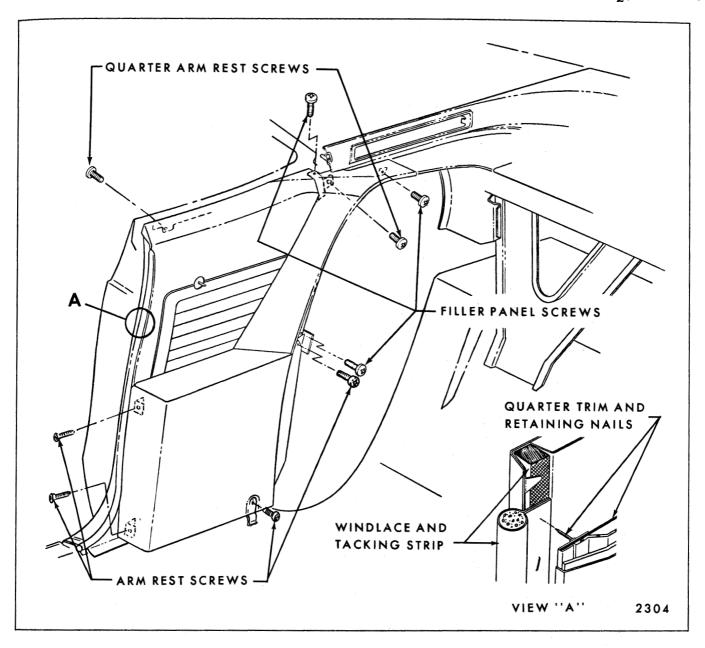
Rear Quarter Trim Assembly - "E" Body 39487 Style
